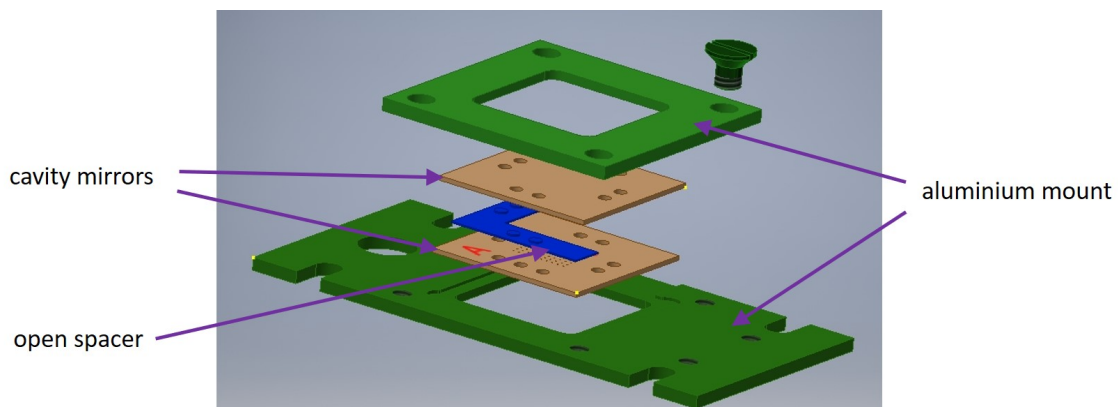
Explosion drawing of the monolithic cavity assembly with an open spacer. Here the mirror chips (brown) are aligned with the spacer (blue). The aluminum mount (green) holds everything together.
